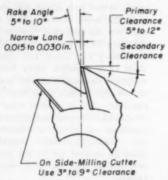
Rake Angle and Clearances for Regrinding Milling Cutters
